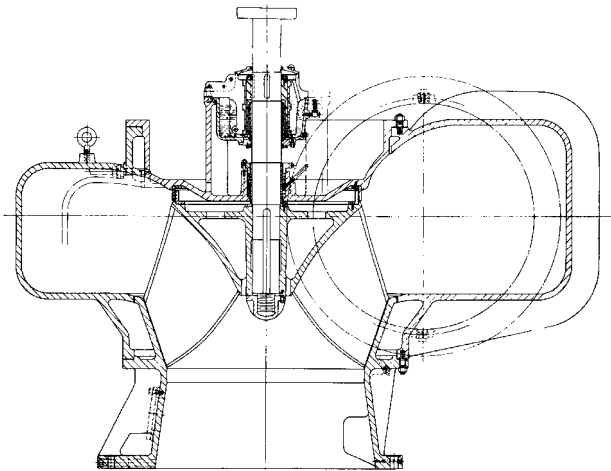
A section of a large, vertical, bottom-suction volute pump with a single sleeve bearing (Flowserve Corporation)
